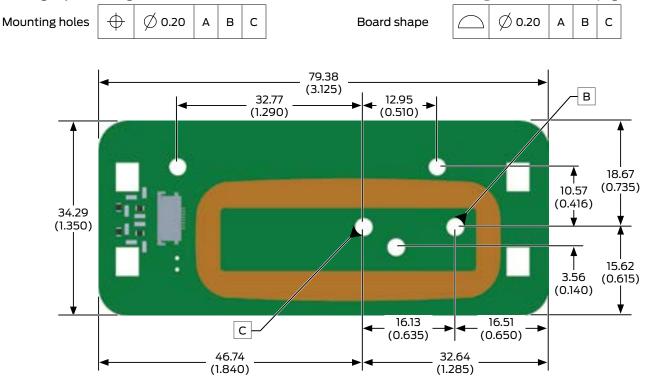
80 mm Antenna Board: Dimensional area and mounting hole locations in mm (inches).
